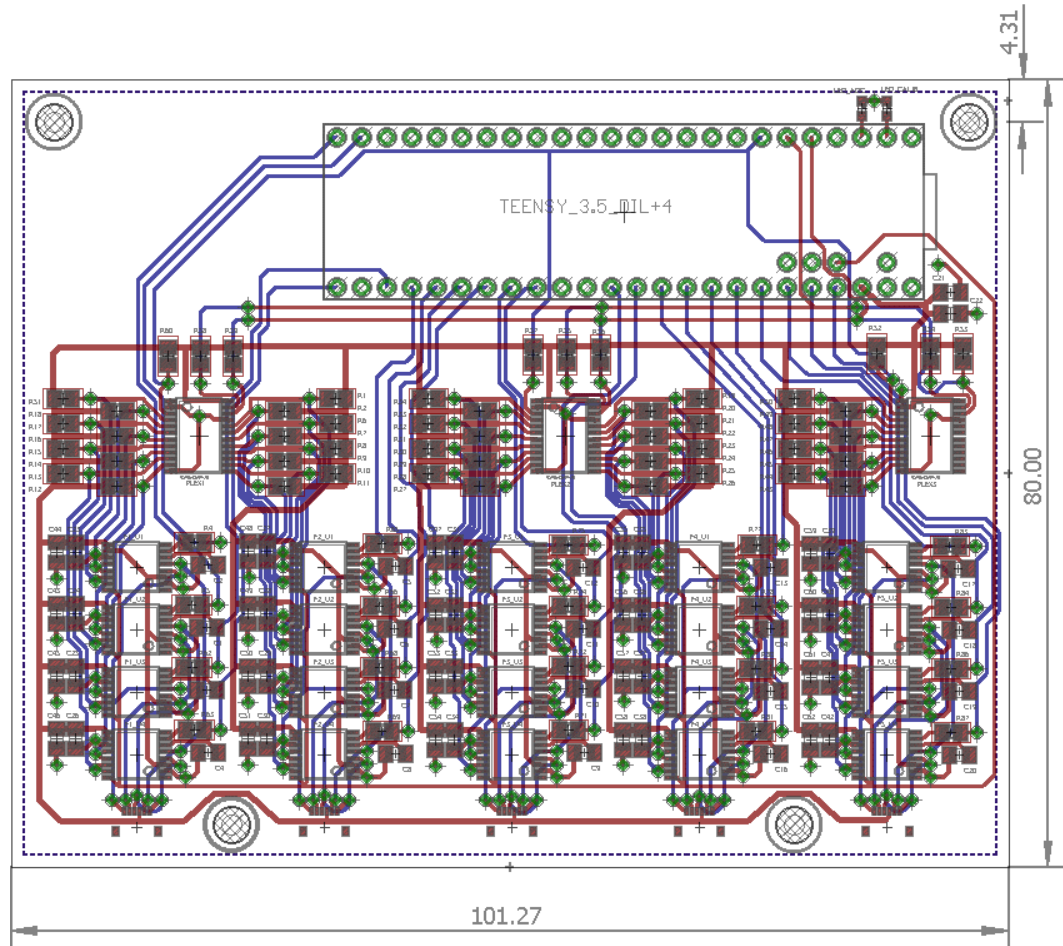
An overall view of the PCB depicts trace layers and components, but hides the ground layers.
